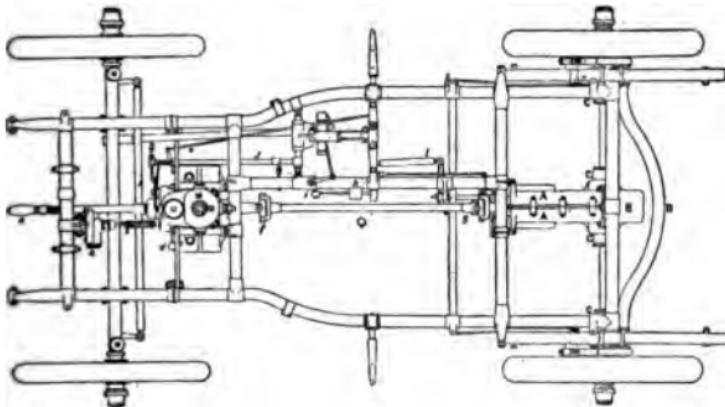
PLAN OF 6-H.P. DE DION CAR
